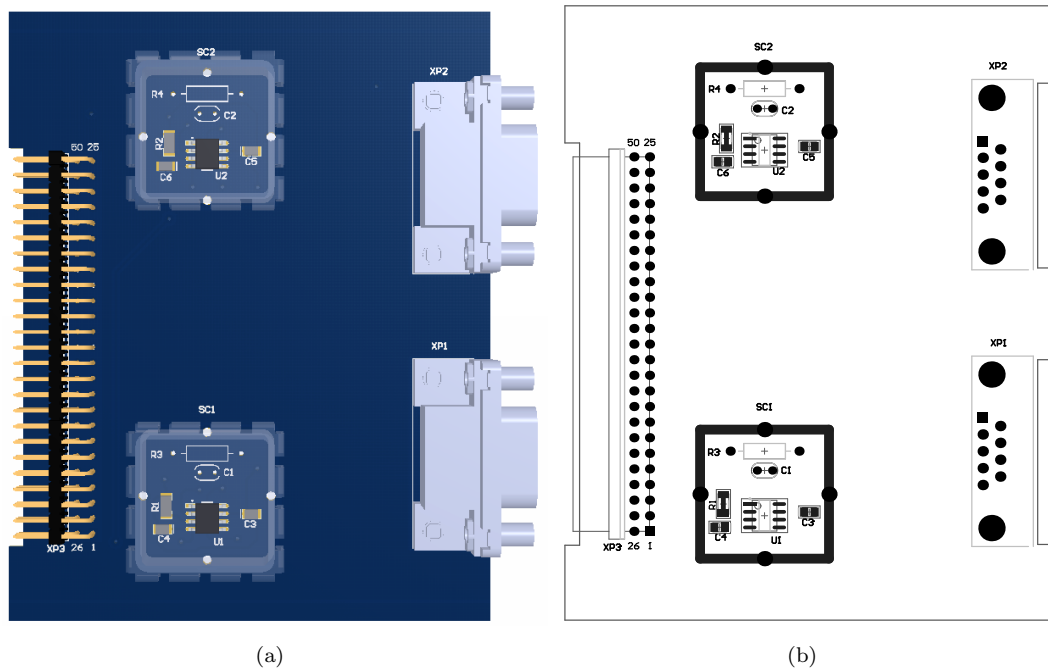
The 3D model and the assembly drawing of TIA module.
